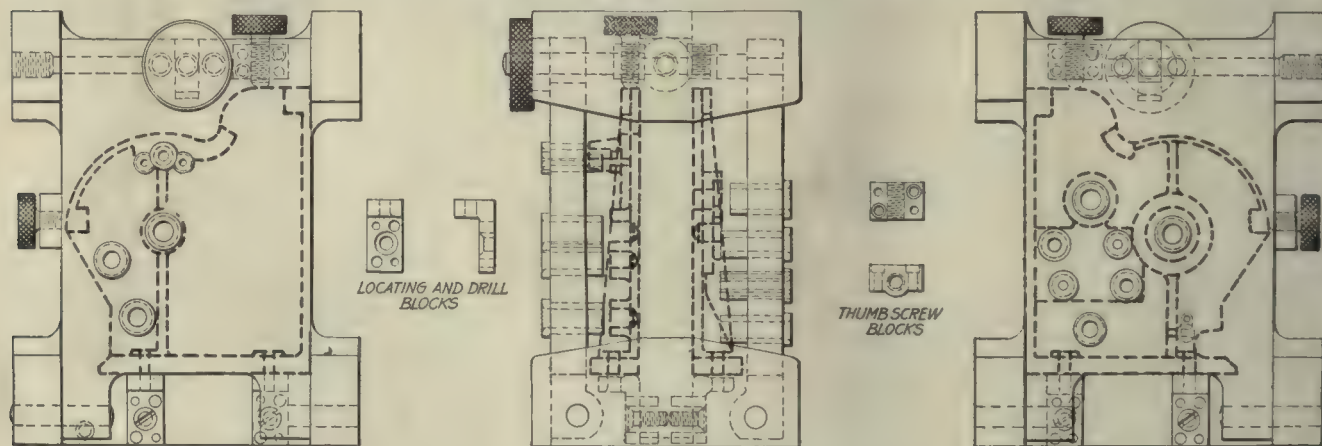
DRILL JIG FOR SIDE BRACKETS
